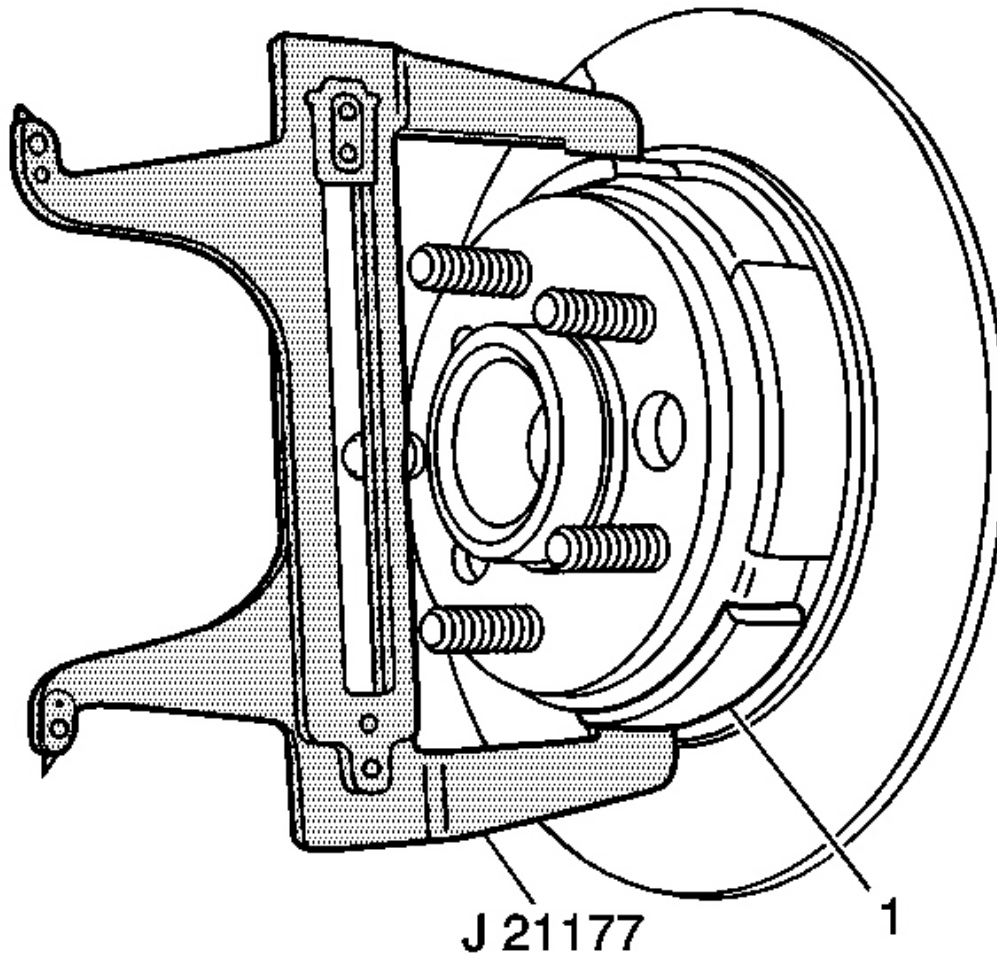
Adjusting Parking Brake Shoes Using J 21177-A
